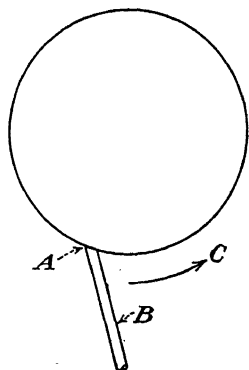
Overhead pipe weld. A. Starting point of weld. B. The electrode. C. Direction of weld.
